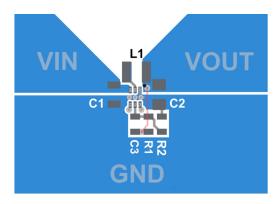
TPS62A0x (SOT563) PCB Layout Recommendation
